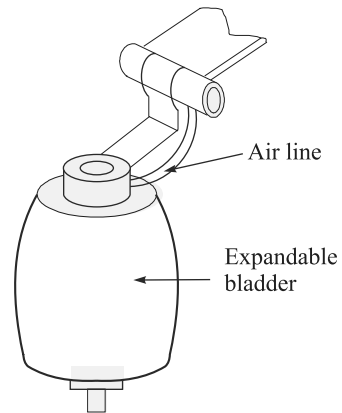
Expandable bladder to grip objects with holes from inside
